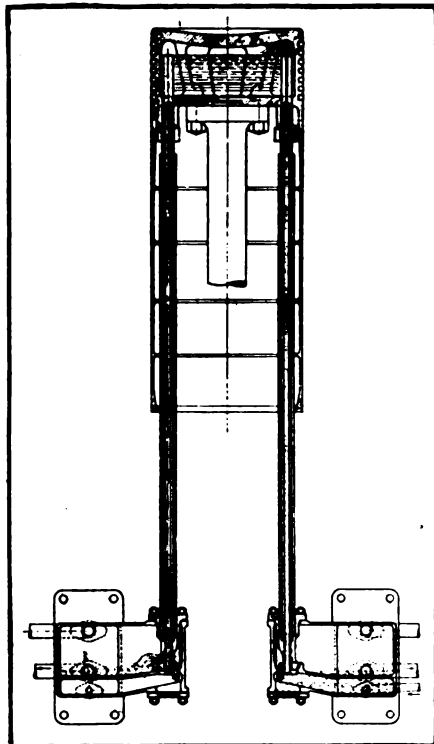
TELESCOPE TUBE PRINCIPLE UTILIZED IN PISTON COOLING
